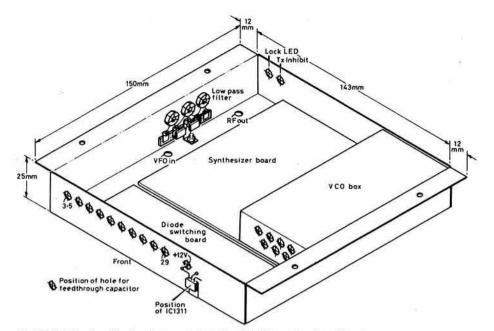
Details of synthesizer box made from tinplate. Dimensions in millimetres
